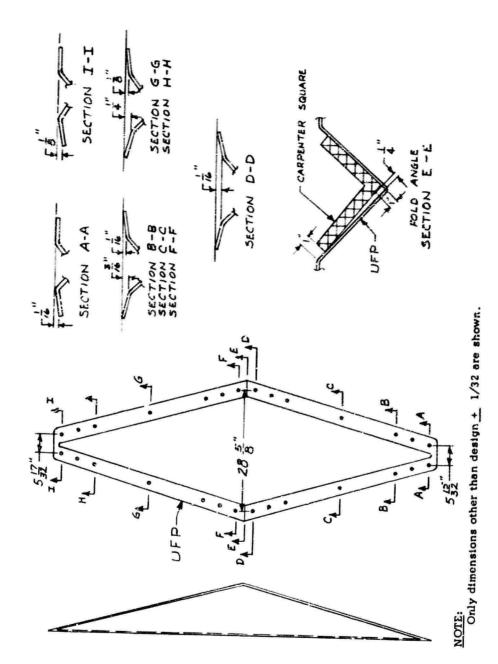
Manufacturing tolerance check - panel 2.
